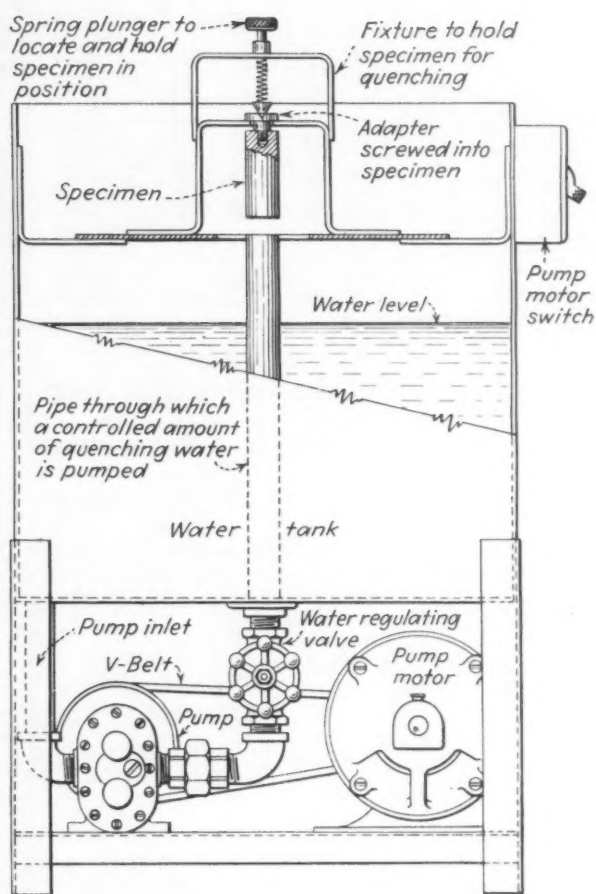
Jominy testing machine used in these experiments. This equipment was built by Fulton Foundry & Machine Co., Inc.
